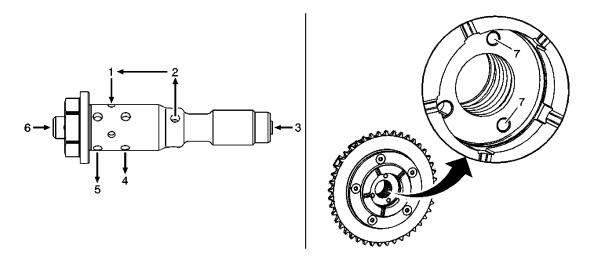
Identifying Actuator Passages Courtesy of GENERAL MOTORS CORP.
